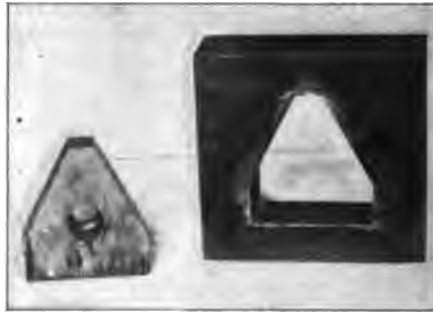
High speed is especially efficient in blanking dies. A pair of dies like this has blanked a million pieces.
